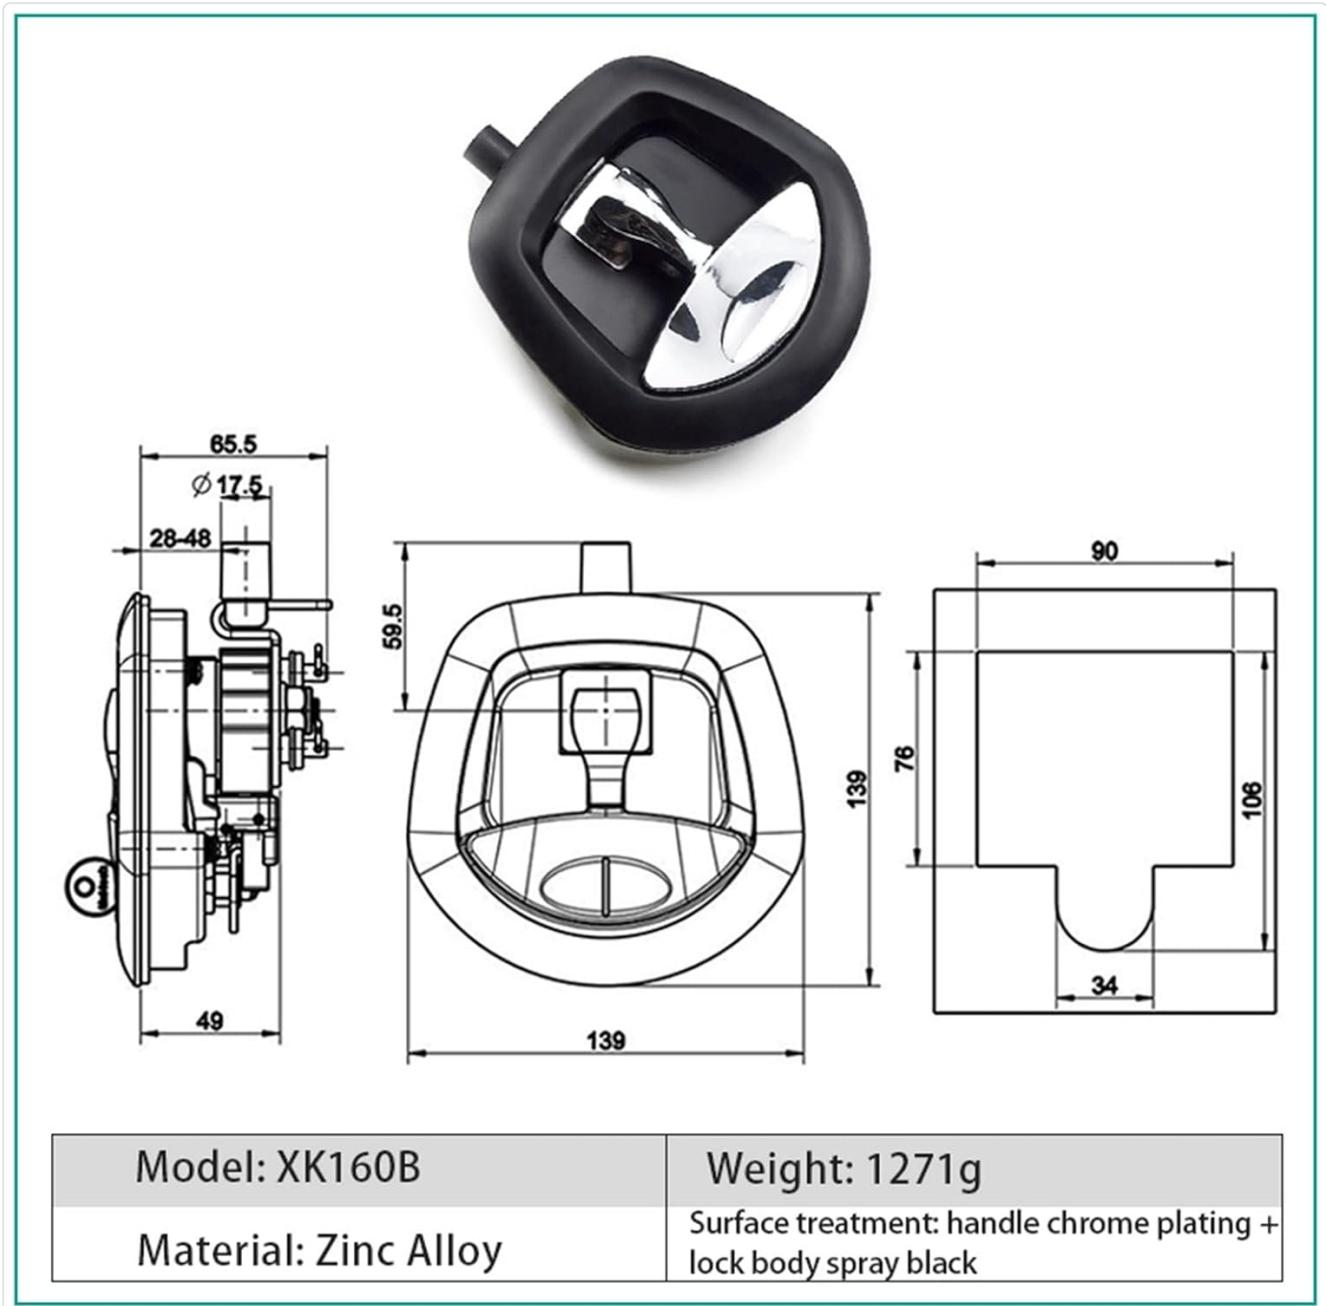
RFXCOM Recessed Paddle Handle Lock Dimensions. This technical drawing provides precise measurements for the lock's body, cutout requirements, and key cylinder diameter, essential for accurate installation.
